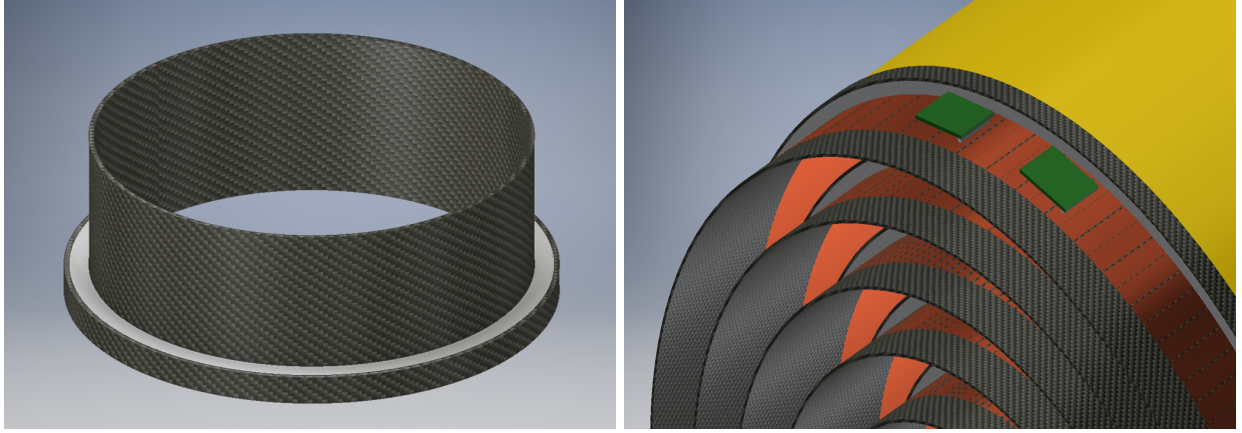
Left: Cylindrical stretching frame assembly of wide ring for readout foil and front-end electronics support (gray), thin ring for clamping drift foil (gray), and drift spacer frame (white). Right: Drift foil (yellow) and μ RWELL/readout foils (copper color) sandwiched between frames. Green rectangles indicate potential positioning of front-end readout electronics.
